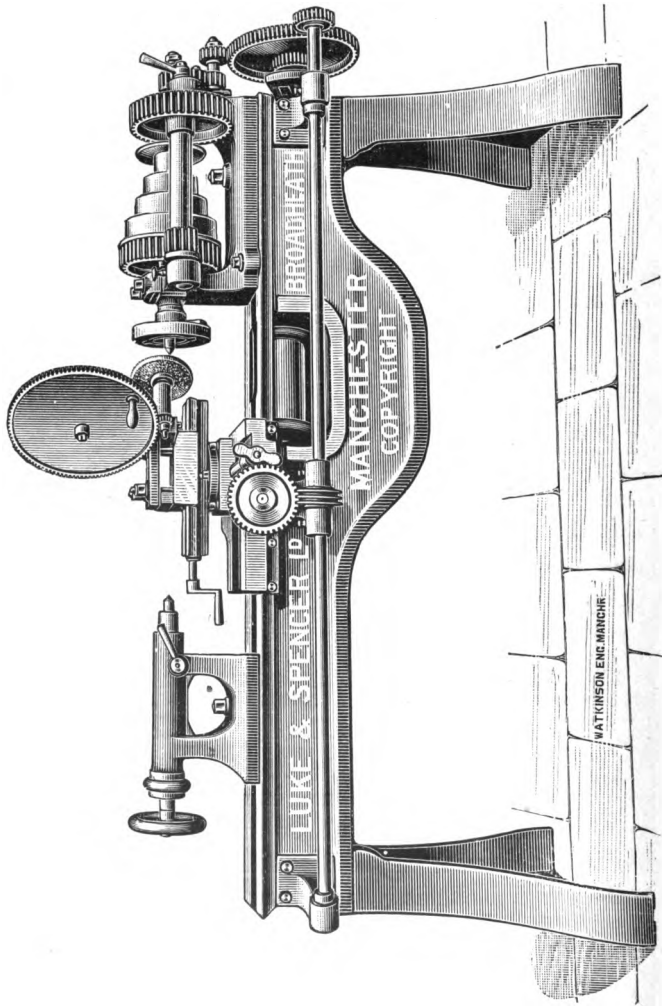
Hand-driven Centre Grinder on Screw-cutting Lathe.
